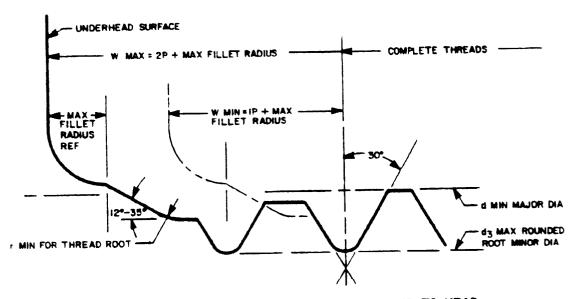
FULL SHANK FASTENER - THREADED TO HEAD
